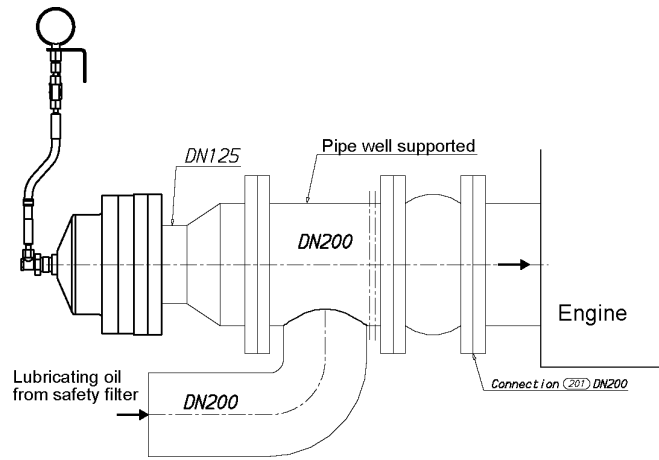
Lubricating oil damper arrangement to external piping (3V35L3112)
